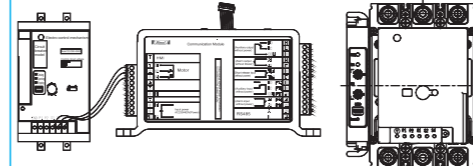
Communication module and motor mechanism assembly effect diagram
